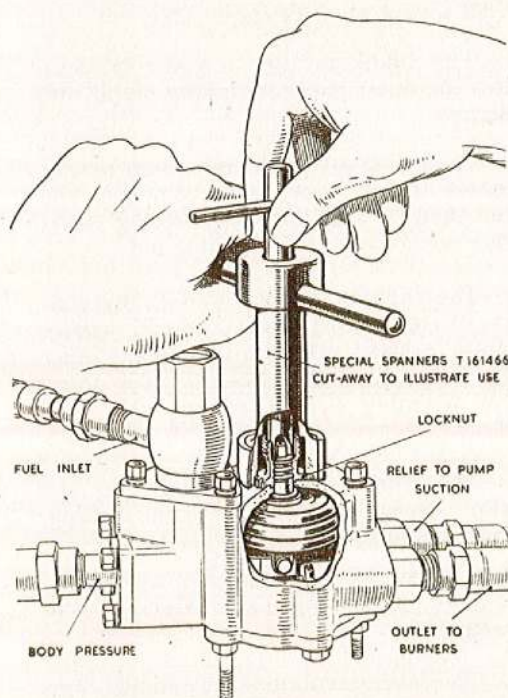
View showing use of special spanners for locking the capsule lock-nut
